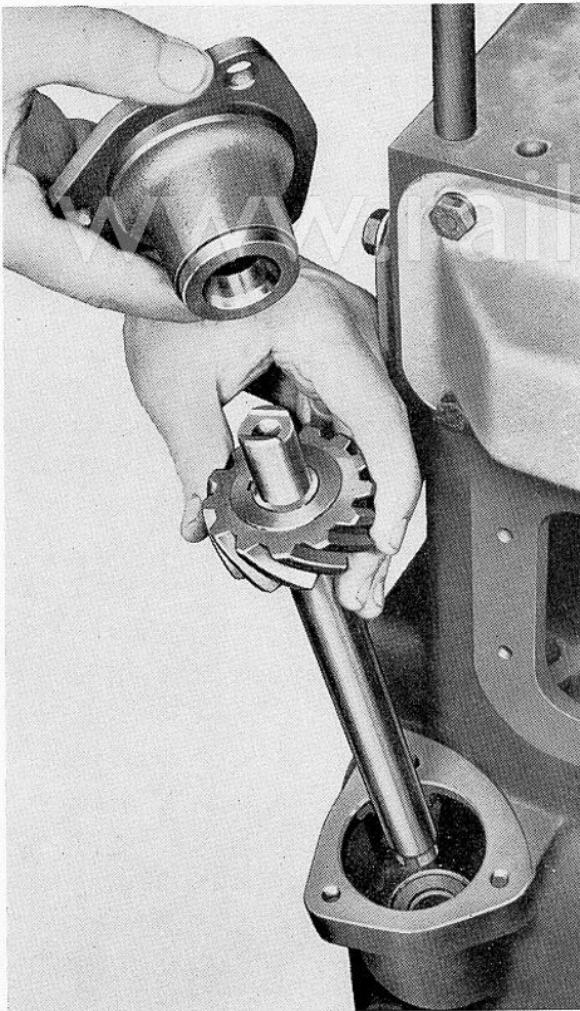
FITTING OIL PUMP GEAR AND THRUST HOUSING
